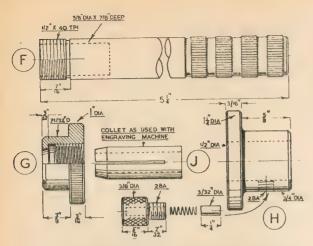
F—the cutter spindle; G—the collet-closing nut; H—the feed collar; J—the collet
